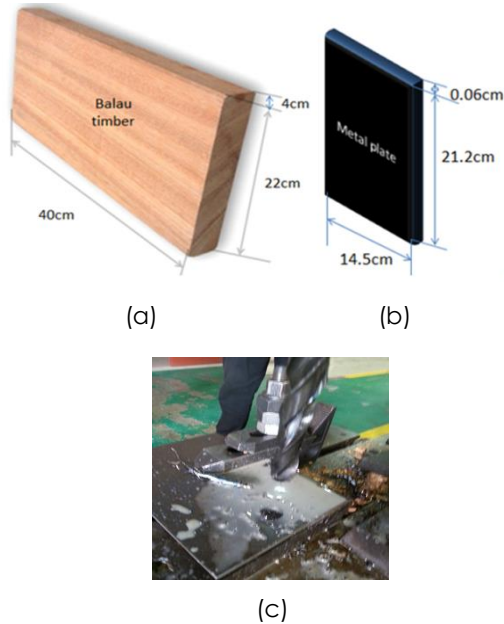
Preparation of materials (a) wood dimension; (b) metal plate dimension; (c) drilling steel plate
